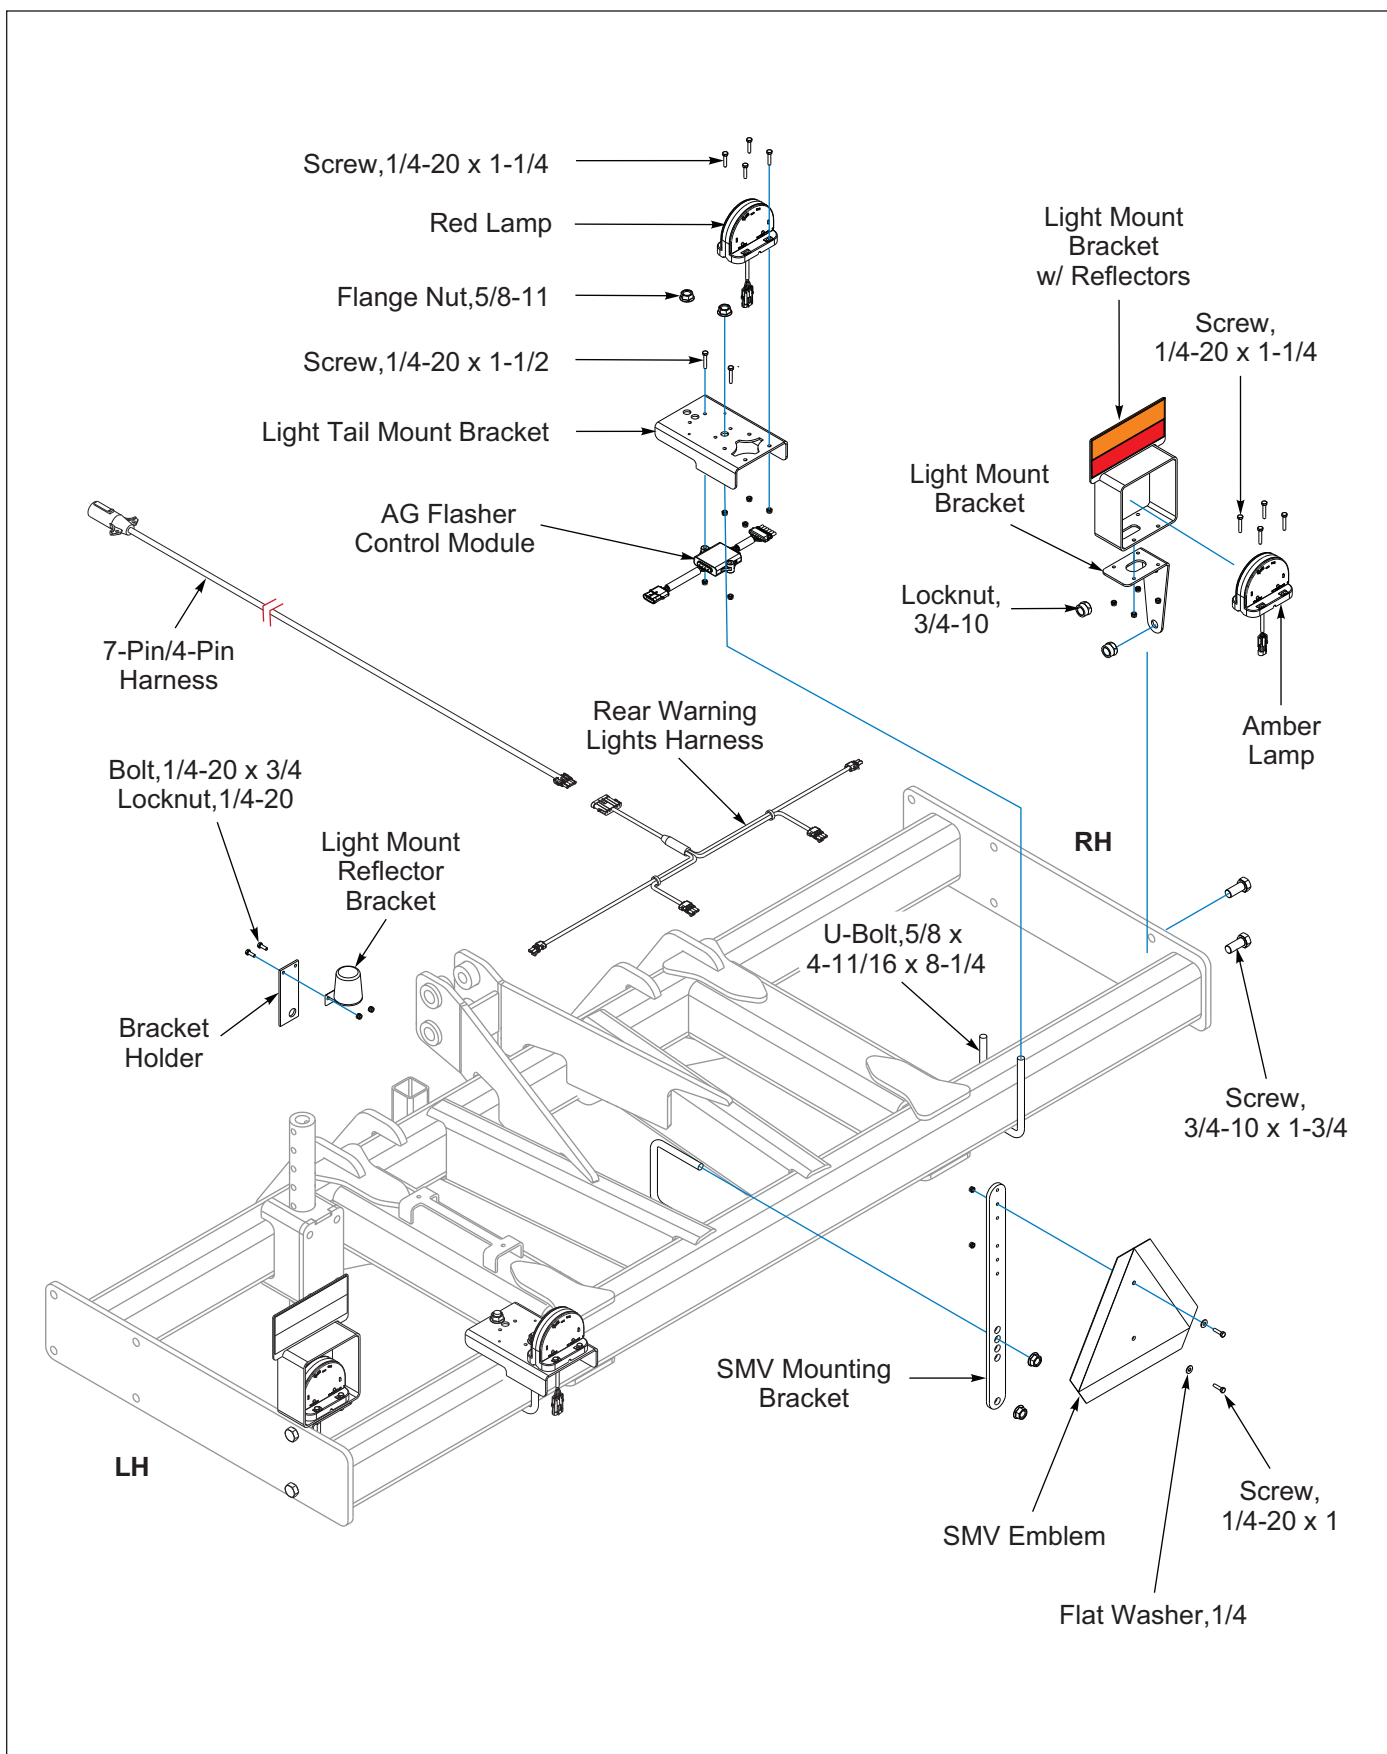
Warning Lamps and SMV Bracket Installation - 3, 4 Shanks
